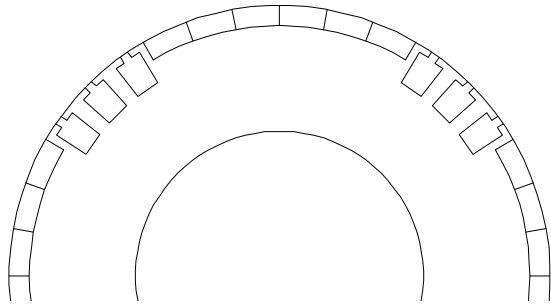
Part of a cross sectional view of a 4-pole rotor
